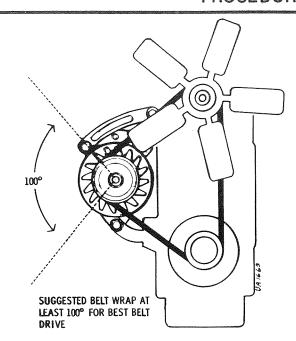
ALTERNATOR BELT INSTALLATION
